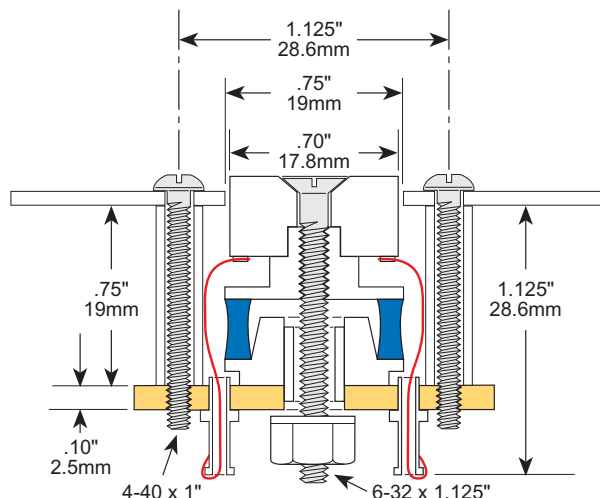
The PEARL chassis-mount Iso-socket is shown above in 125% cross-section. Note that it fits straight into the holes used by the great majority of conventional 9-pin chassis-mount sockets thus making retrofit into older equipment a simple matter.
